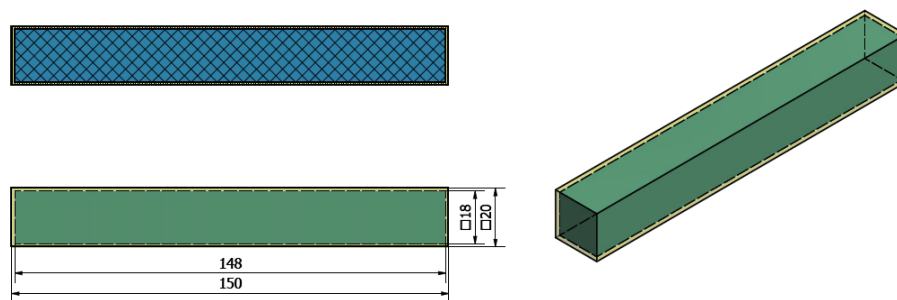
Geometry of square cross-section demonstrator (dimensions in mm)
